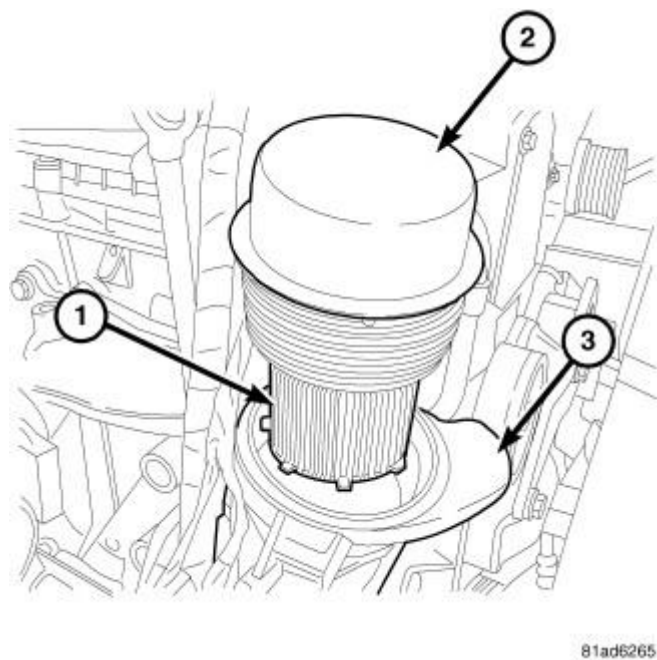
OIL FILTER HOUSING ADAPTER & BOLTS
